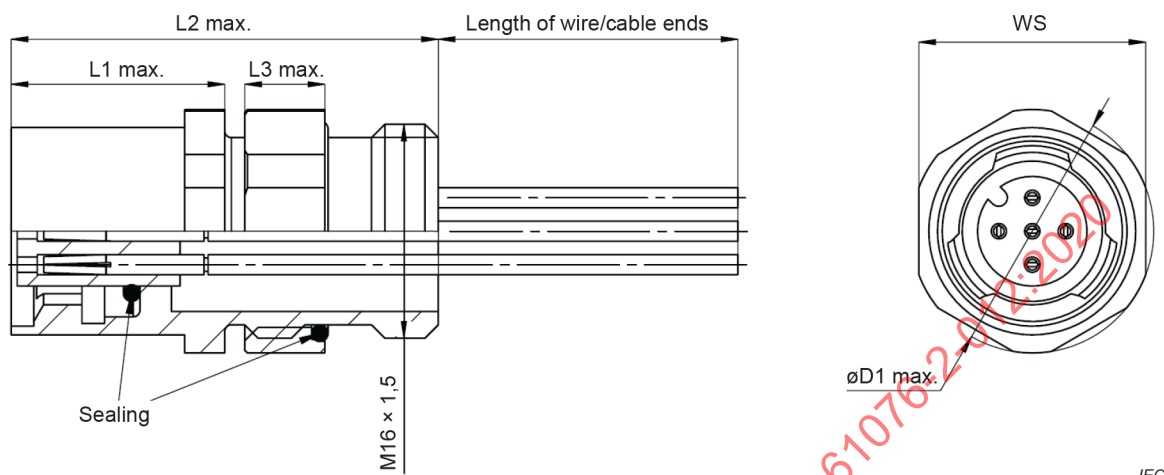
Style GF_M12_PPI – Fixed connector, female contacts, with inner push-pull and screw locking, mounting with thread M12 × 1, with wire/cable ends, single hole mounting thread M16 × 1,5, mounting orientation
